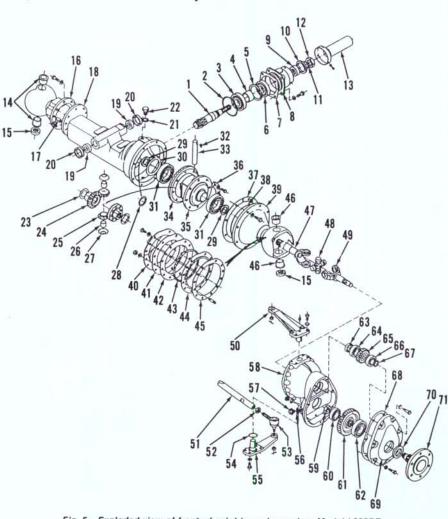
Exploded view of front-wheel drive axle used on Model L225DT.
